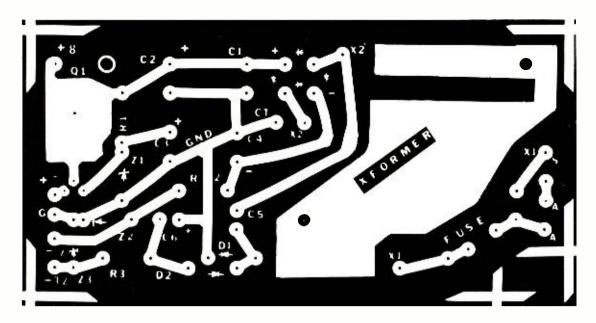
Full-size etching and drilling guide for power supply pc board.
